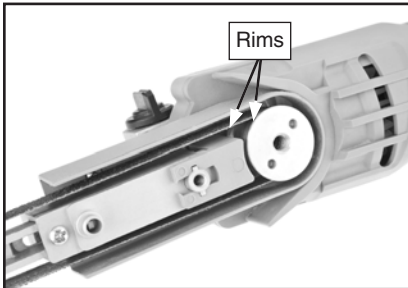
Sanding belt installed between wheel rims (cover removed for clarity).
